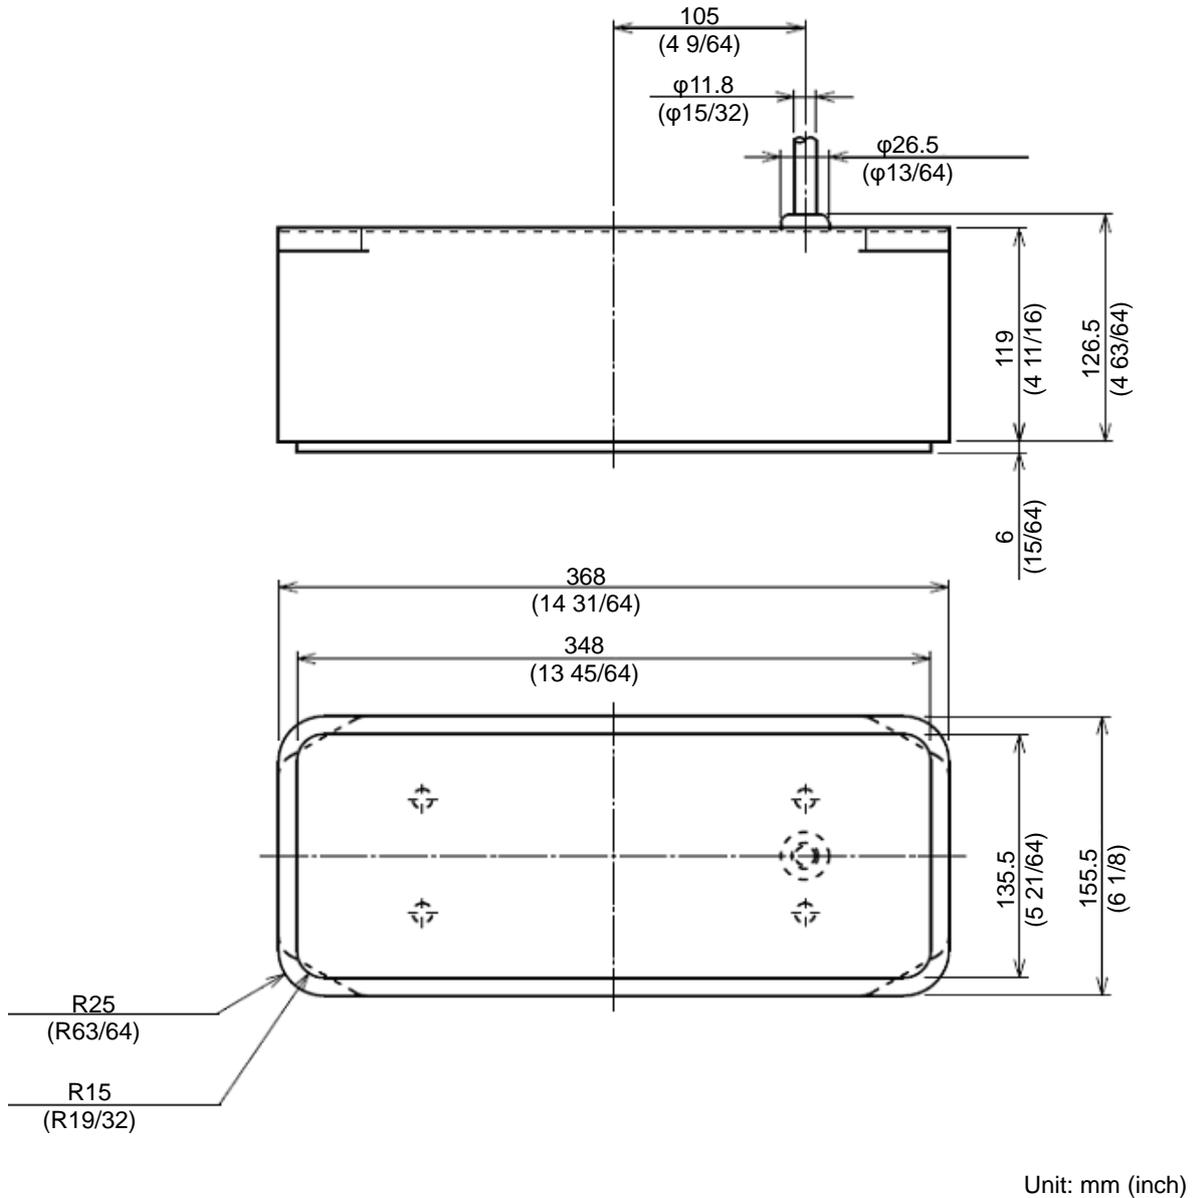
Outline dimensions of a transducer (TDM-052A/TDM-062A/TDM-083)
